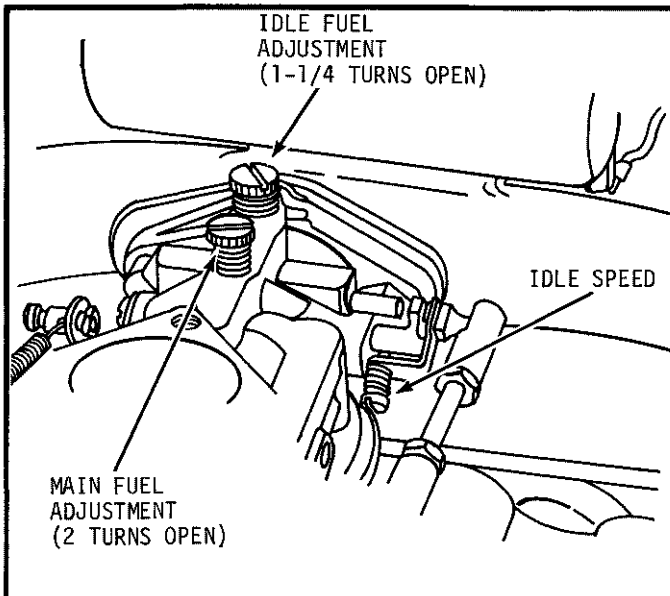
ADJUSTMENTS, TYPICAL SIDEDRAFT CARBURETOR (K482, K532)
